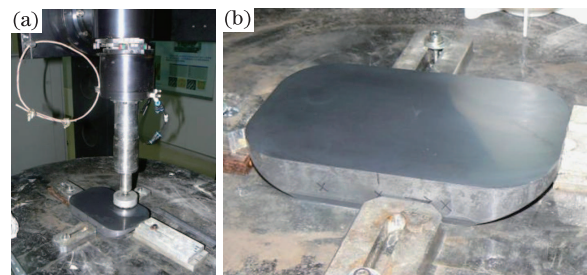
(a) Experimental picture. (b) SiC workpiece picture.
